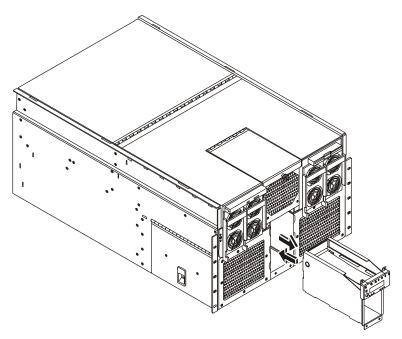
Removing the Hard Drive Bay from the Chassis
